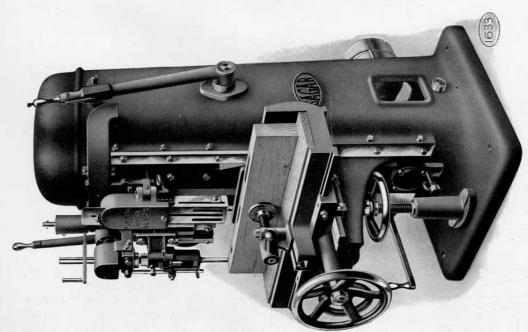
Front View Semi-Automatic Chain Cutter and Hollow Chisel Mortising and Boring Machine (IZ2)
